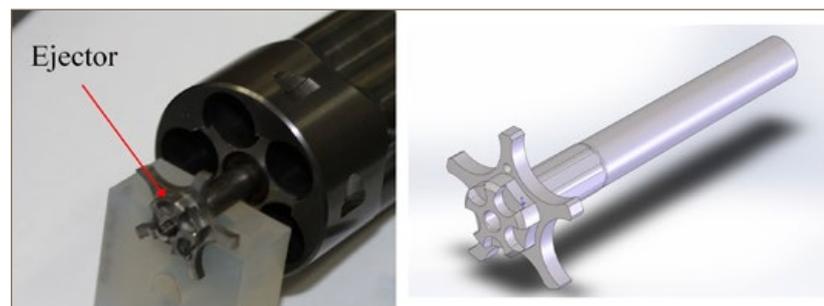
The star shaped ejector in Ruger's LCR® (left) and a metal injection moulded ejector blank (right)
